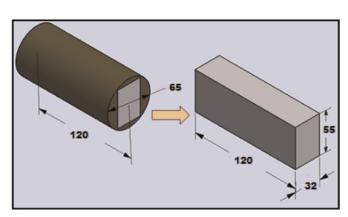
Scheme of the workpiece geometry used in this study (units in mm).
